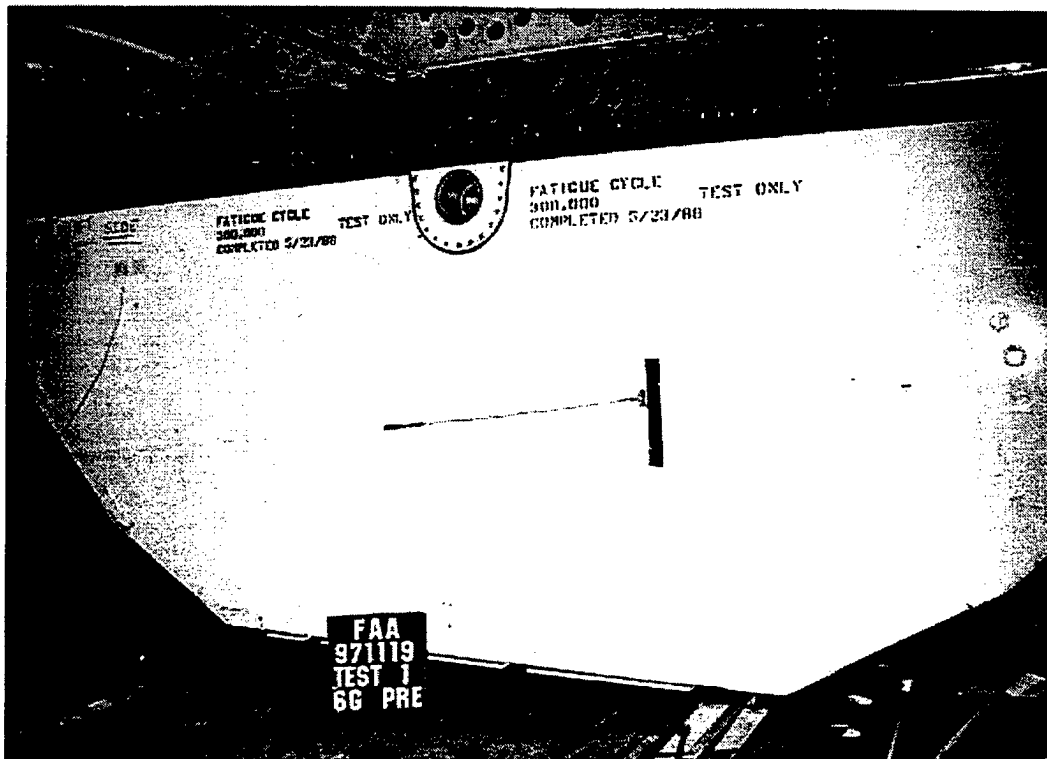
PRETEST AUXILIARY FUEL TANK REAR OVERALL VIEW
